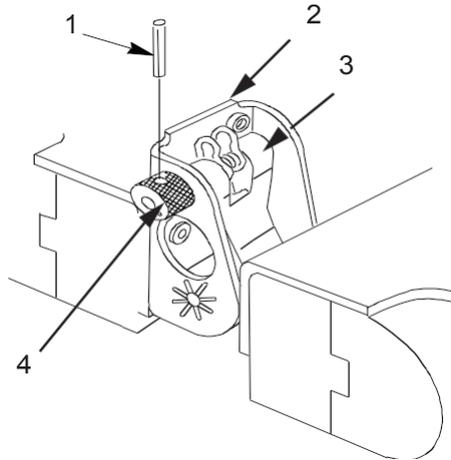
Rear Sight Base, Windage Knob, Machine Screw, Spring Pin.
